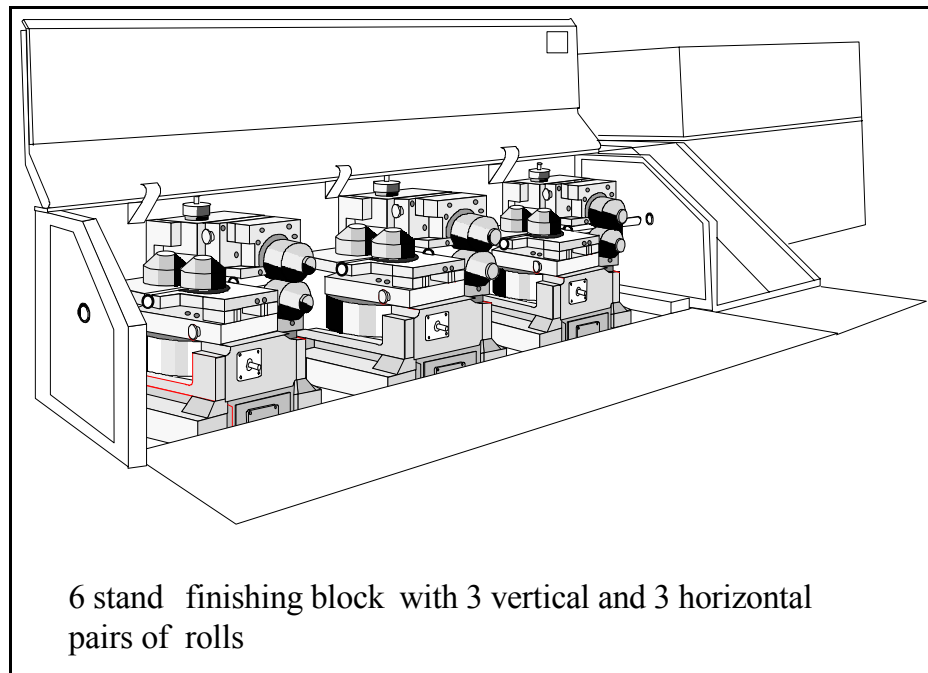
Roller arrangement of wire rod finishing section [EUROFER HR]
